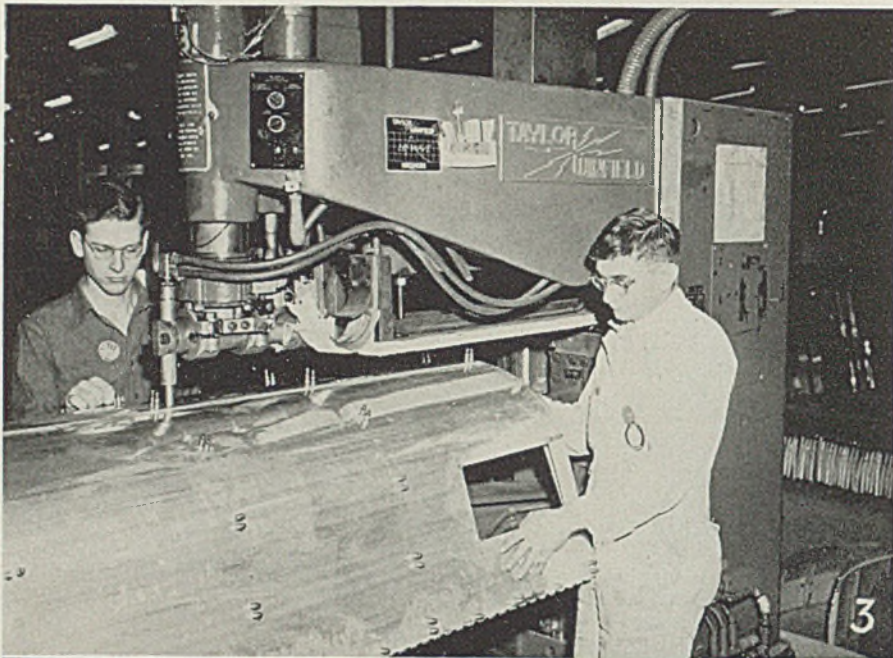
Cabin assembly being spot welded at a Boeing plant. Cleco pins are used to keep the sheet and reinforcing stiffeners in position
